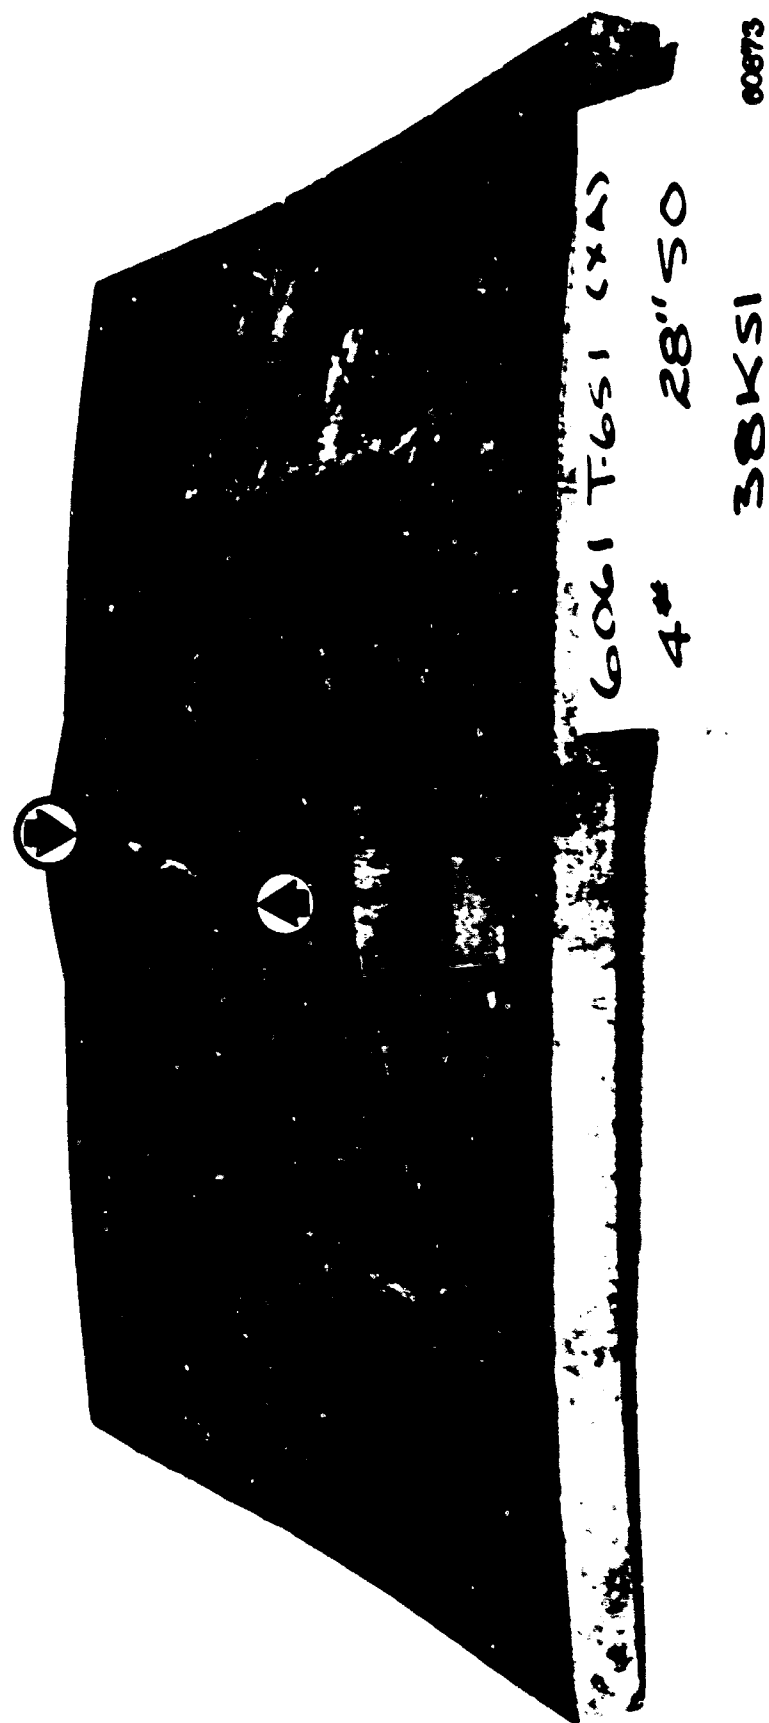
Explosion tear plate of 6061-T651 loaded to 8.2% plastic strain.
